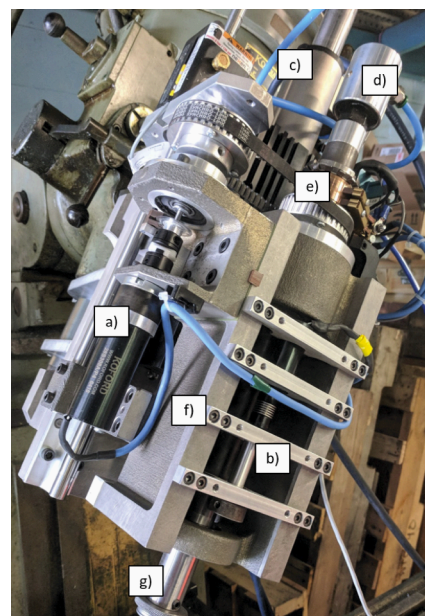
LEW automated unit assembly: A — Rotating relative motion motor; B — vibrating relative motion motor and eccentric weight; C — linear motor electrode consumption and force compensation; D — integrated shielding gas control; E — LEW current transfer brushes; F — sliding unit assembly; G — spring and force compensated LEW spindle. (Image courtesy of Huys Industries.)
